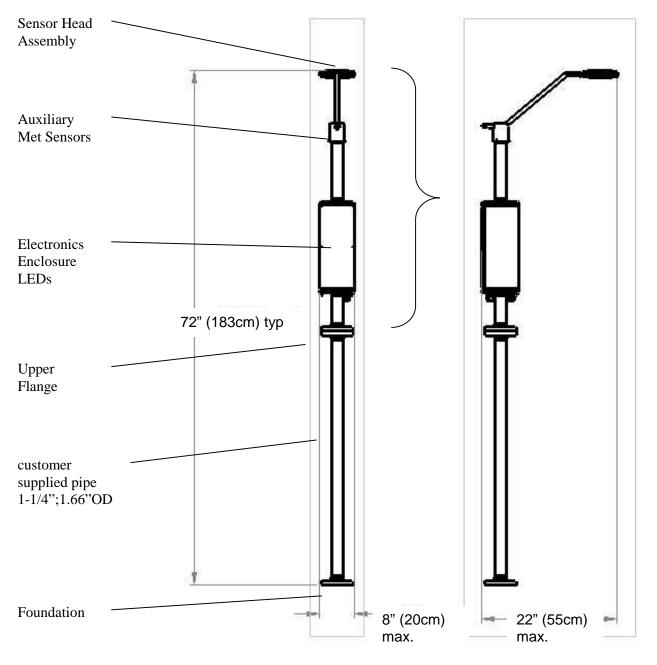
Mechanical Interface Drawing for a typical installation, dimensions in inches (cm). System is supplied with a post between electronics enclosure and "Upper Flange" point, but is shown here mounted attached to on customer-supplied stand built from two flat pipe flanges and a 36" section of threaded pipe. Total sensor height above ground is controlled by the mounting post, and is typically 5-6 feet to maintain the plates out of reach of animals and small children.
